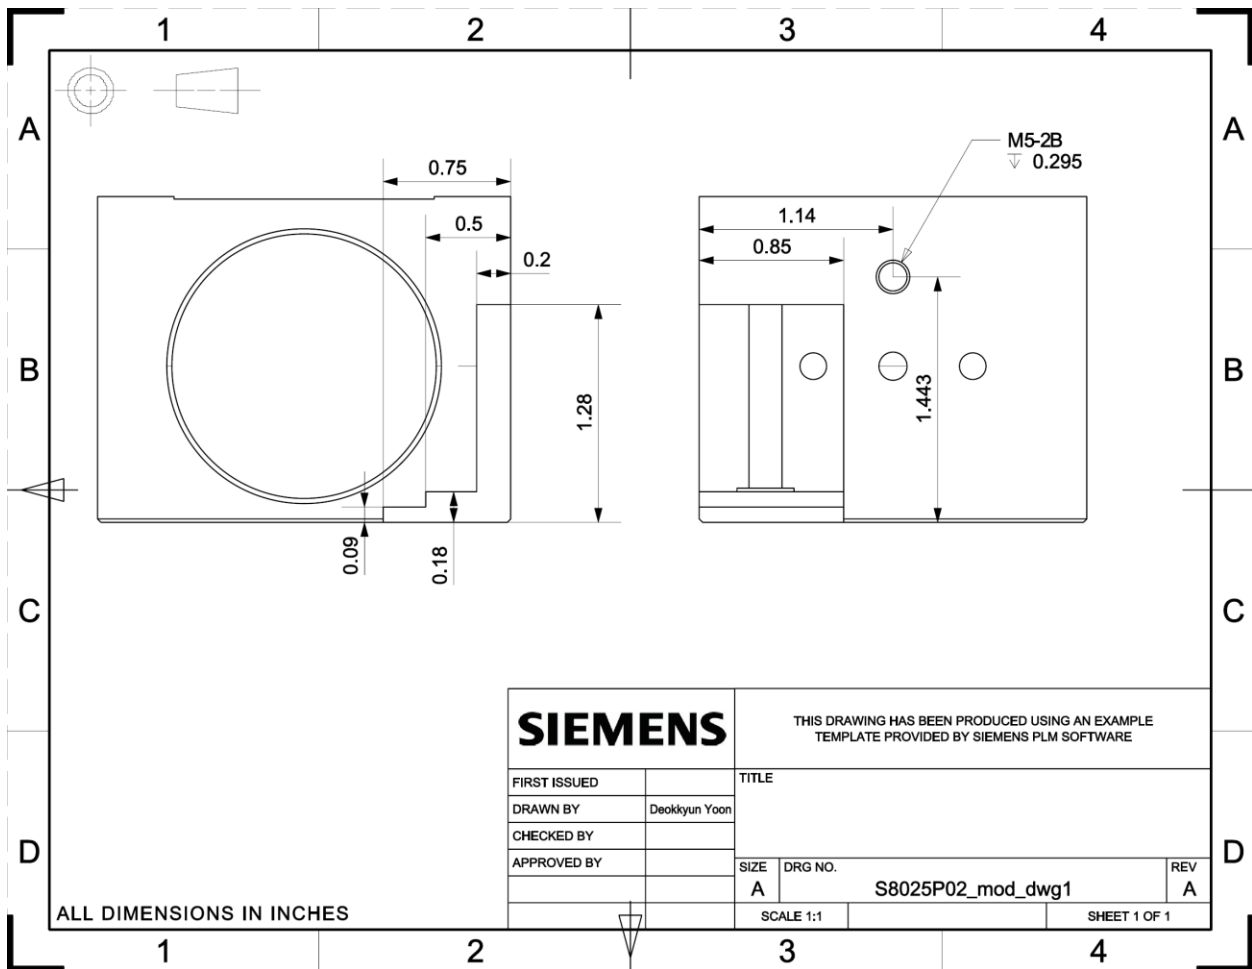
Manufacturing drawing of modified Air Bushing Mounting Block.
